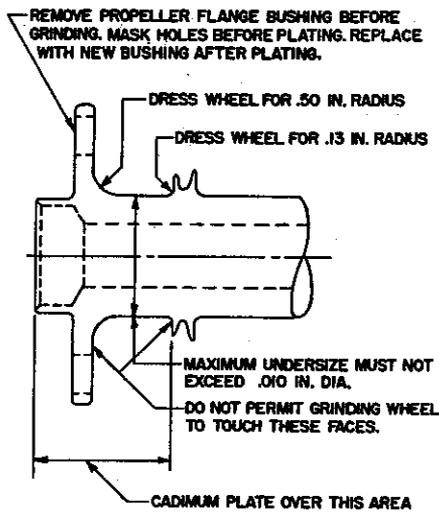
Reconditioning Crankshaft Oil Seal Surface
